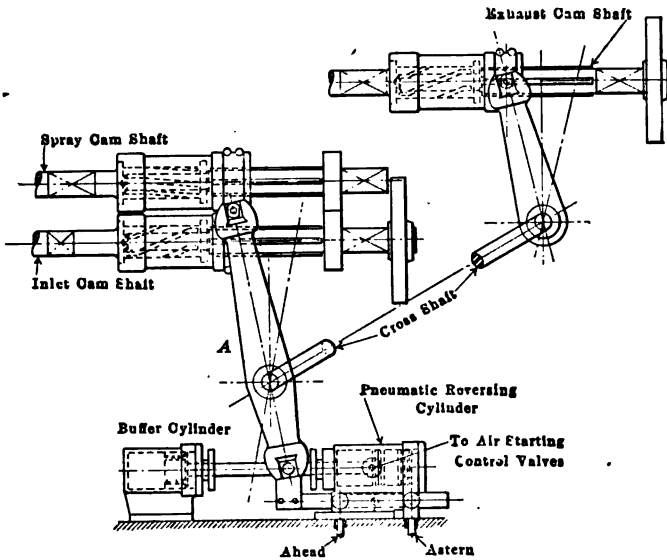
Nelseco four-cycle-engine reversing mechanism.
